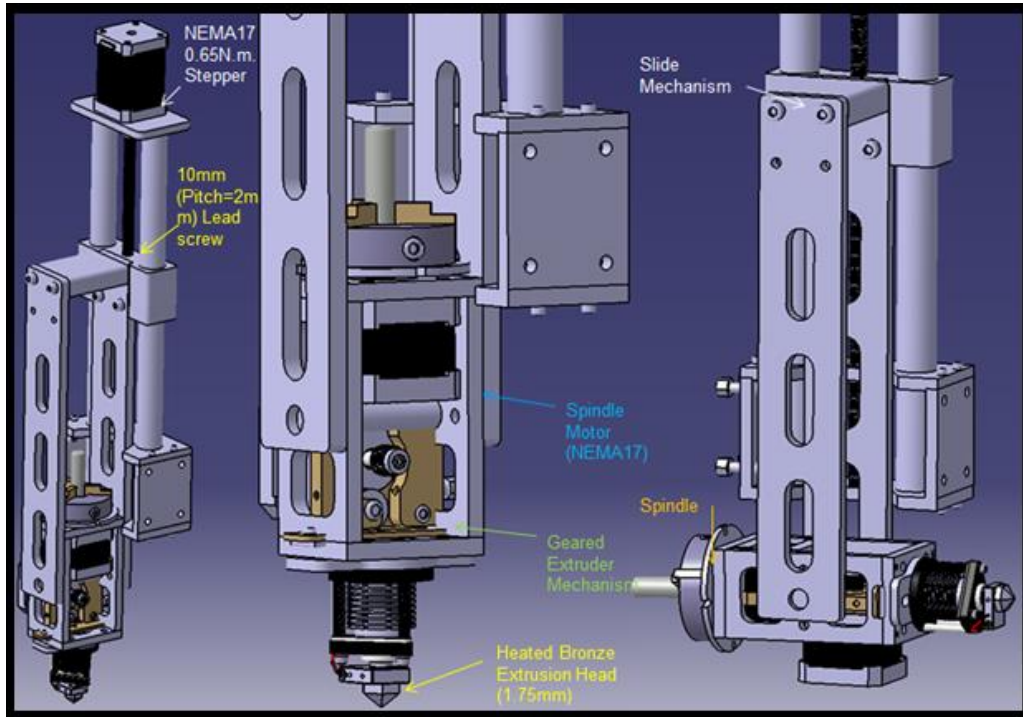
CNC/FDM Hybrid 3D Printer Concept: Print Head
